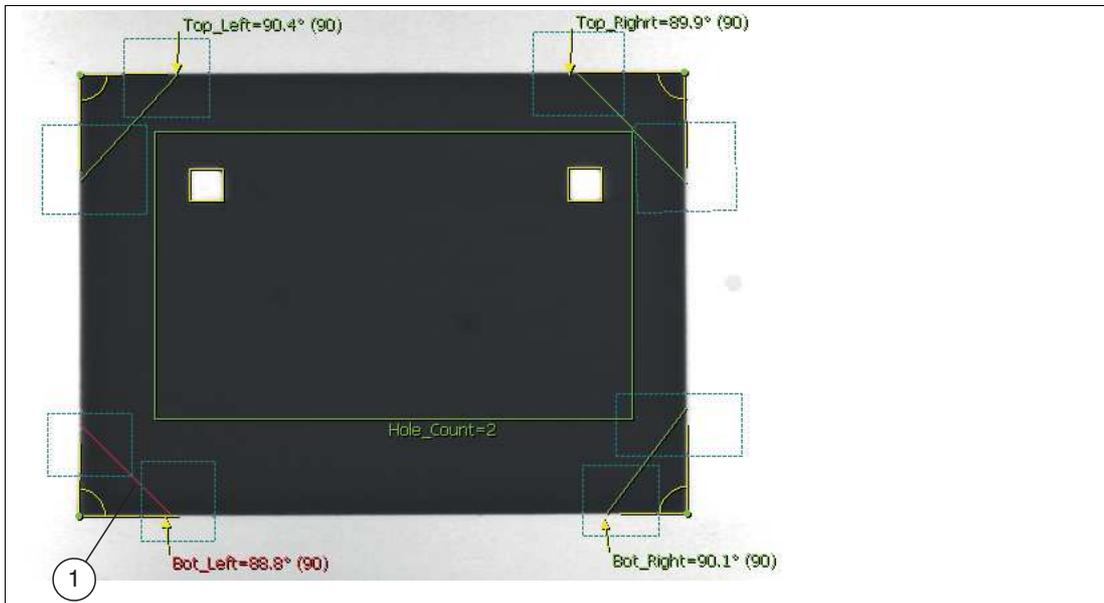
Example: cutting accuracy at each corner of a metal plate
